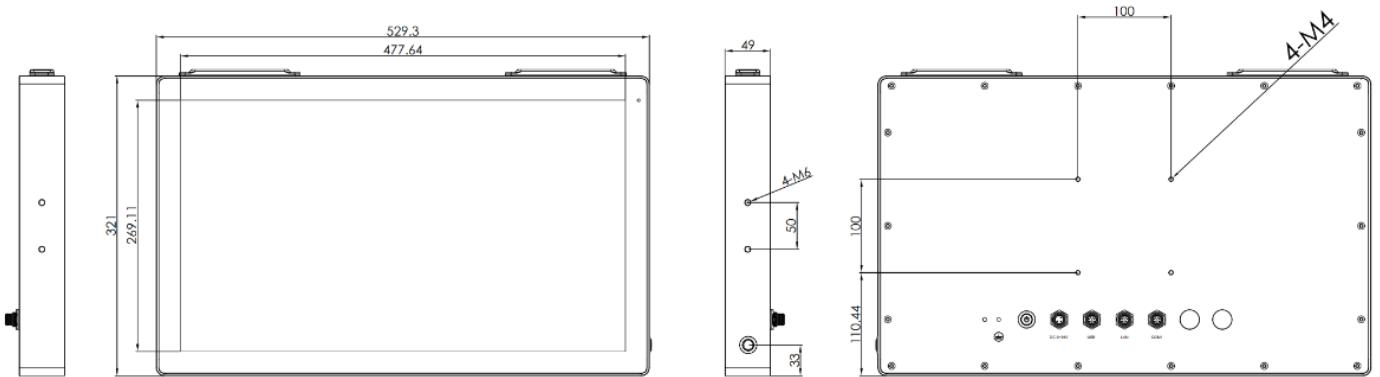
3 Dimensions of NuTAM-821CP(H)
